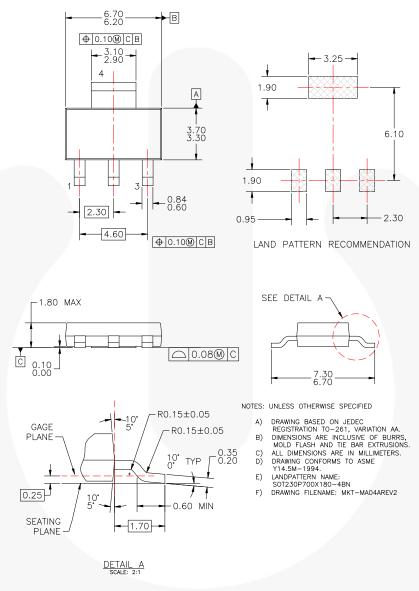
MOLDED PACKAGING, SOT-223, 4-LEAD (ACTIVE)
